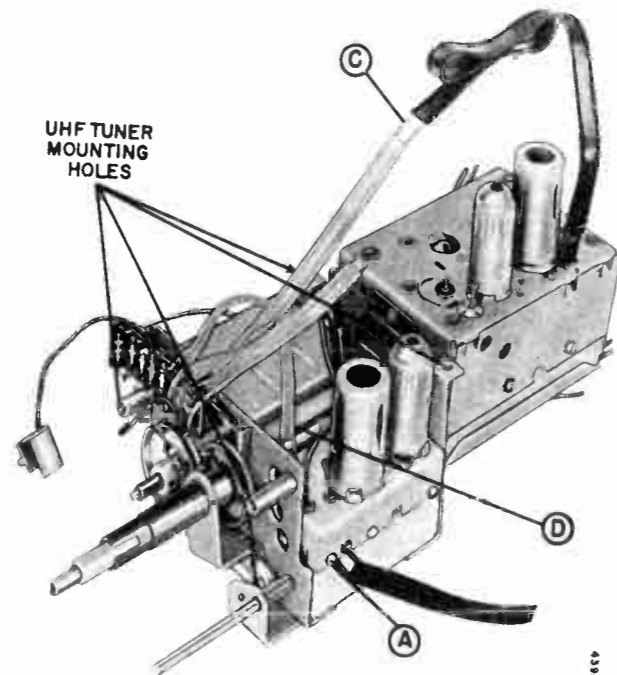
View of UHF and VHF Tuners With Connection Points for UHF Tuner Replacement.
